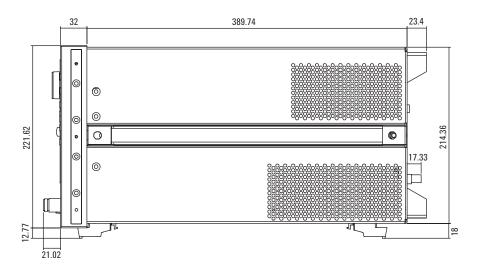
Main unit dimensions (side view, in millimeters, typical)
